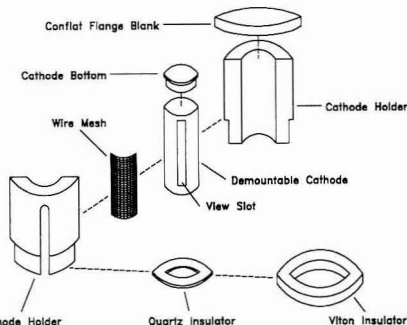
An exploded view of the hollow cathode assembly used in this experiment.
